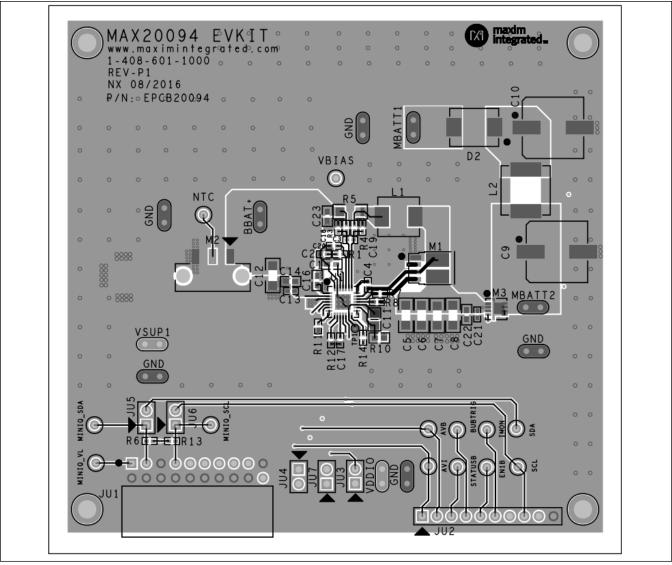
MAX20094 EV Kit Component Placement Guide/PCB Layout
